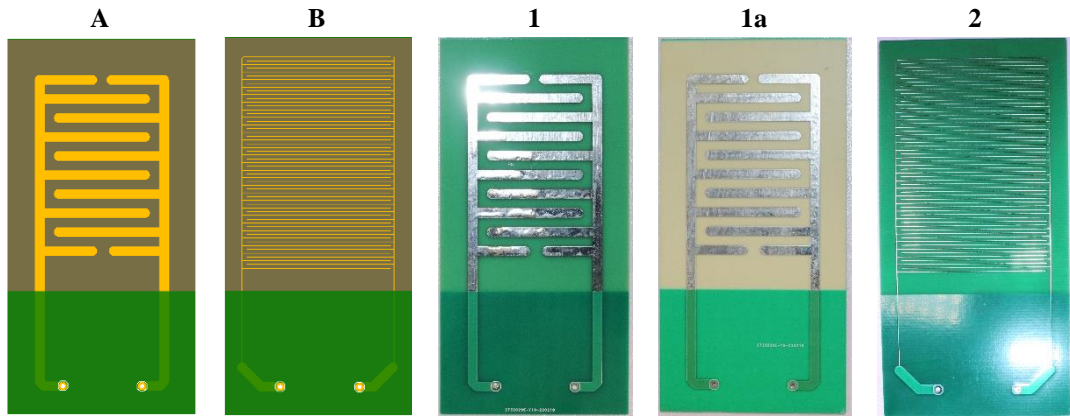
The designed PCB boards including designs (A/B) and produced boards on FR-4 (1/2) and aluminium (1a)
